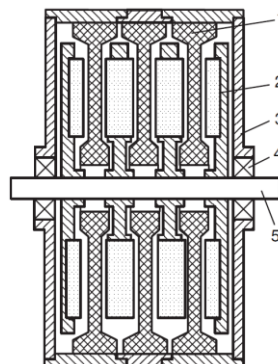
Multidisc AFPM Machine with Coreless Stator: 1–stator winding, 2–rotor, 3–frame, 4–bearing, 5–shaft [46]
